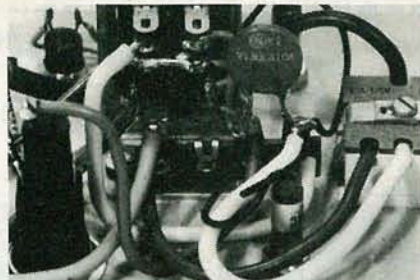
MAKE CERTAIN THAT ALL components and wires are securely soldered to a terminal. No components should "float," and no wires should have in-line splices. Such construction will help ensure glitch-free operation for your computer.
